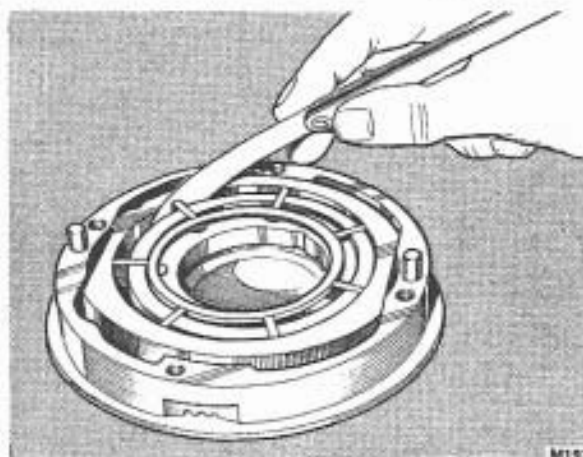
CHECKING THE VANE DIAMETRICAL CLEARANCE
